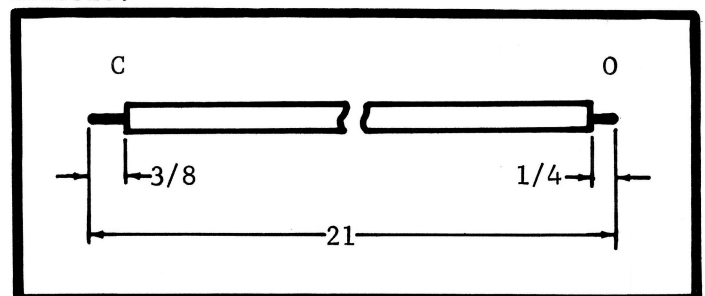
Dimensions for Cable #4 for Voltage Programing. Dimensions are in inches.
